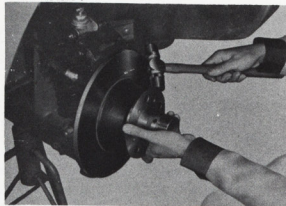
Removing Axle Hub & Brake Disc V1326
